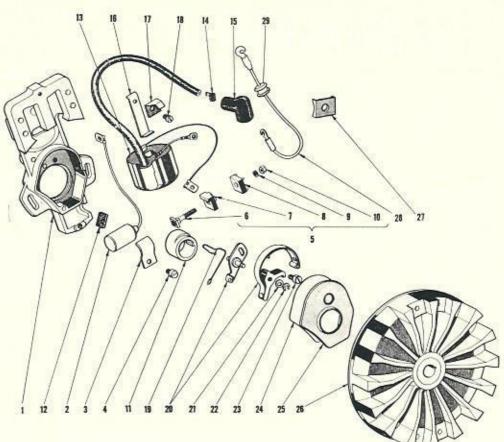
Exploded view of Wico magneto used on Model 275 Canadien chain saw. Refer to Fig. CA6 for view of mag-neto and backing plate showing timing marks.
